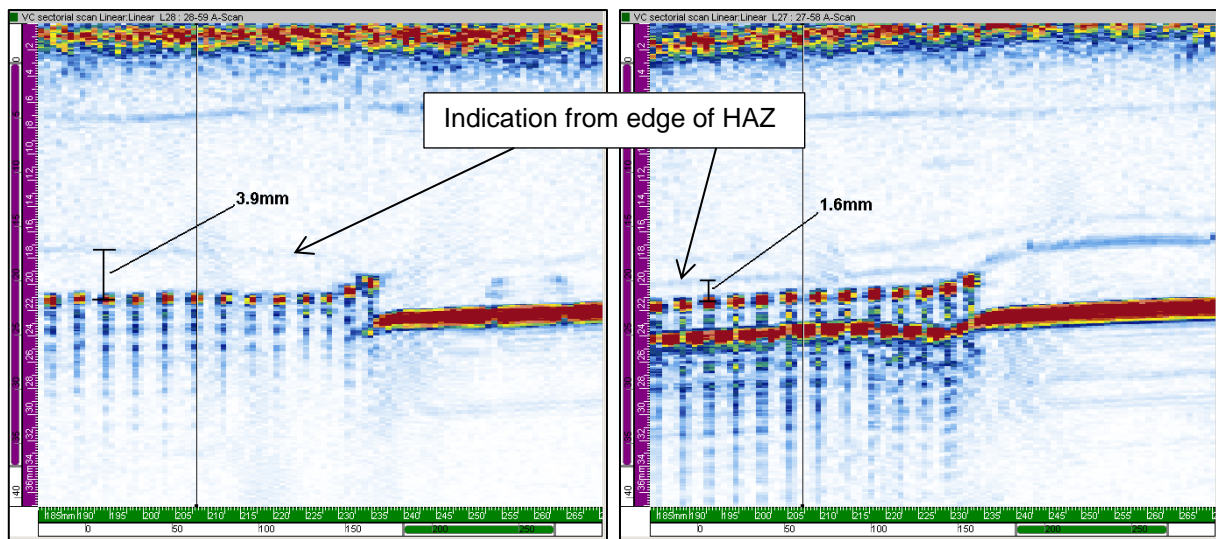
B-scan images of electrofusion welds in 225mm PE pipes: weld made using standard heating time (left), and weld made using reduced heating time (right).
